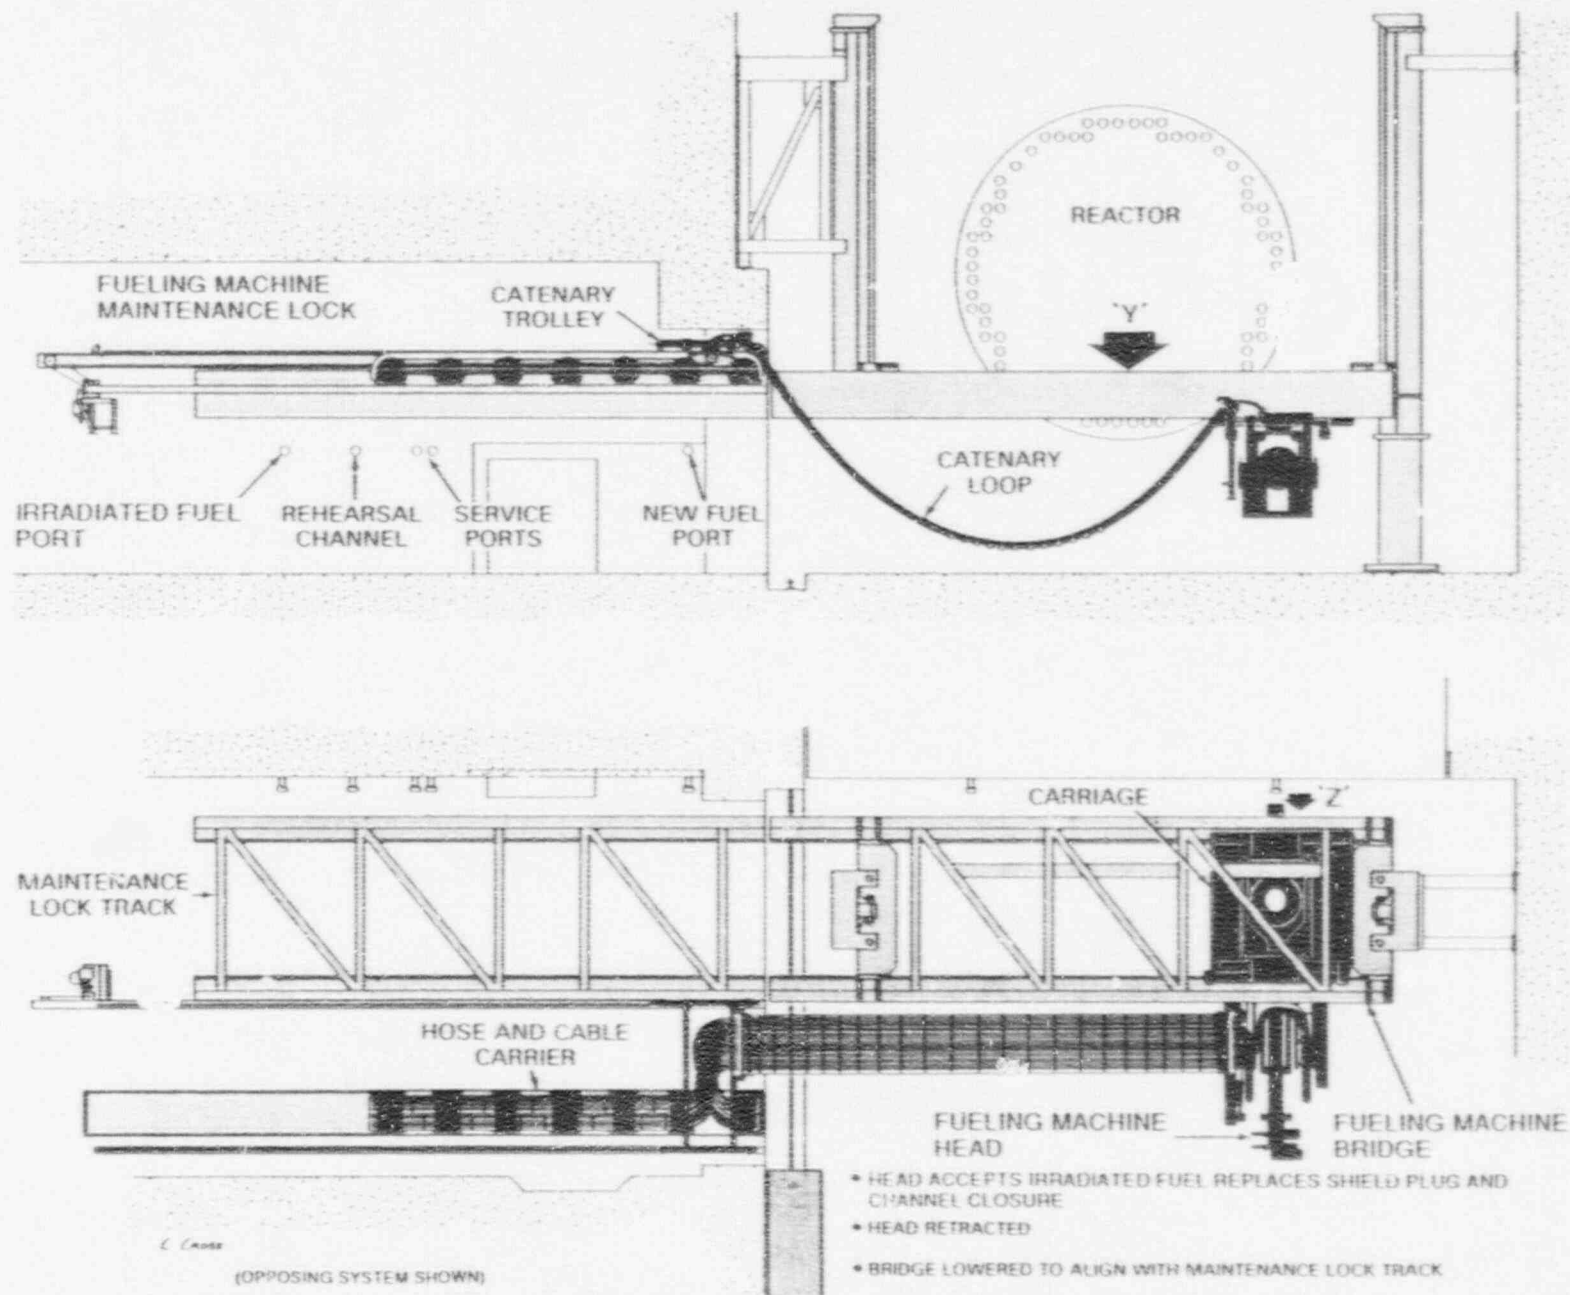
FUELING MACHINE LEAVING REACTOR FACE
